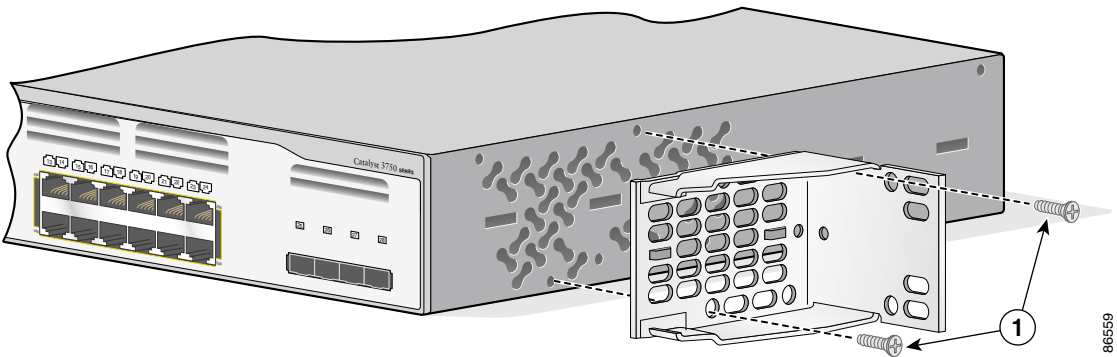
Attaching Brackets for 24-Inch Racks, Rear Panel Forward
